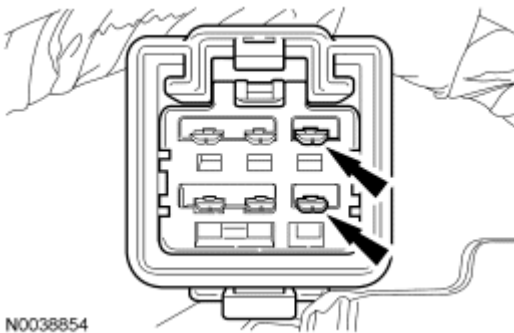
Locating Power Seat Track Motor Electrical Connector Pins
